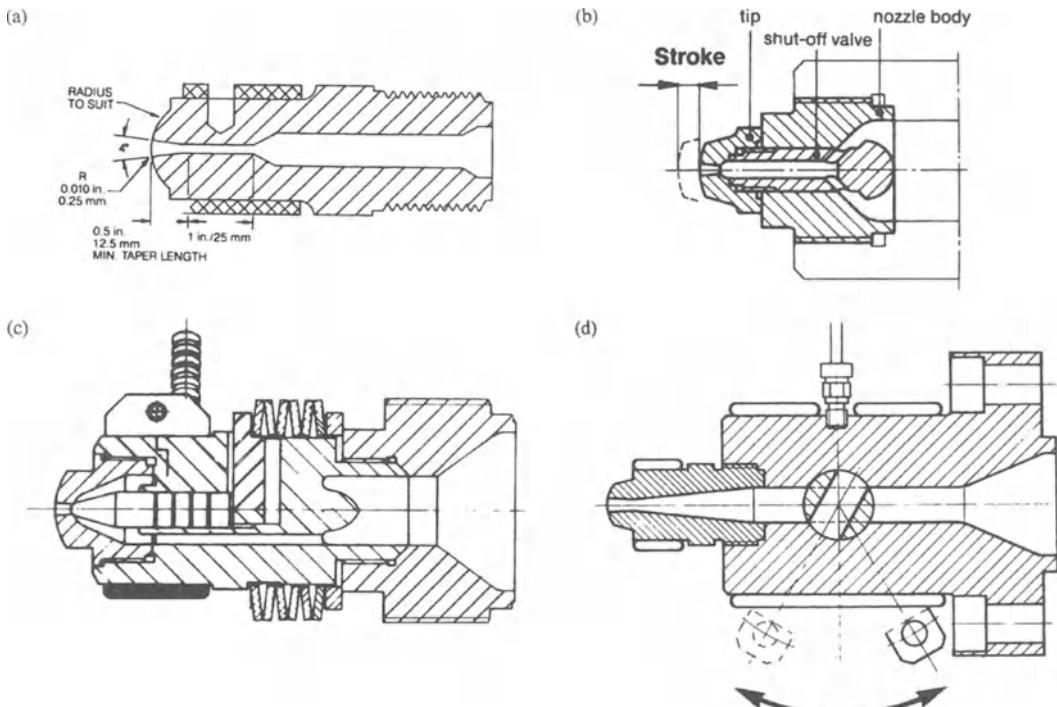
Nozzle designs: (a) Conventional reverse tapered nozzle. (b) Sliding shutoff nozzle. (c) Spring-operated valve nozzle. (d) Mechanical shutoff nozzle, usually operated hydraulically.
